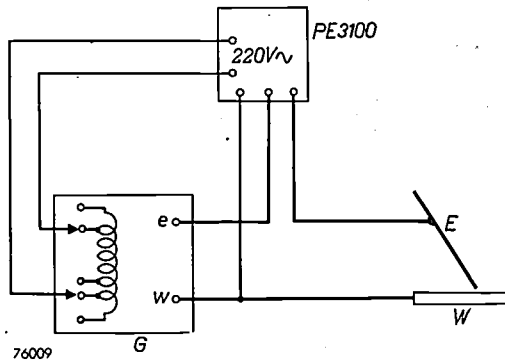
Connection of the protective appliance PE 3100 to a welding generator. The only connections necessary are:
